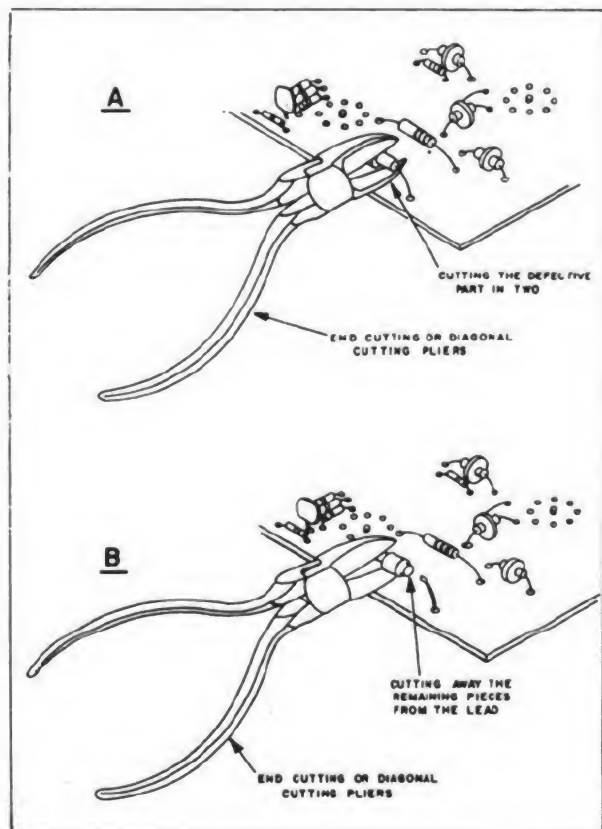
Replacing a defective part by cutting its leads.
